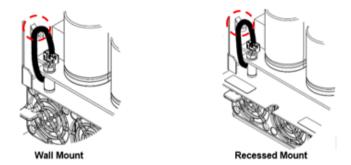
Connecting the fan wire plug into the PIU PCBA
